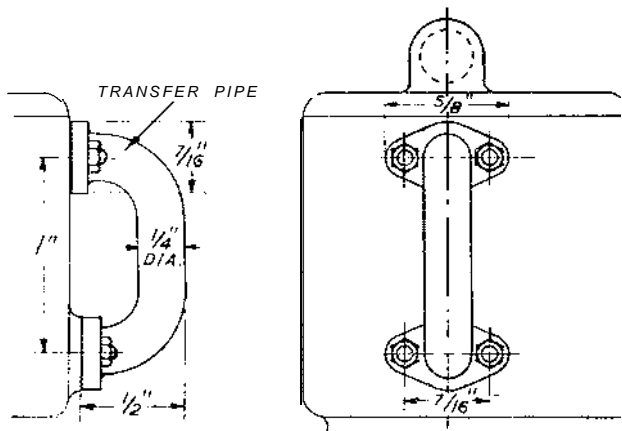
Showing how a transfer pipe may be fitted to communicate between water jackets in main and cylinder-head blocks
